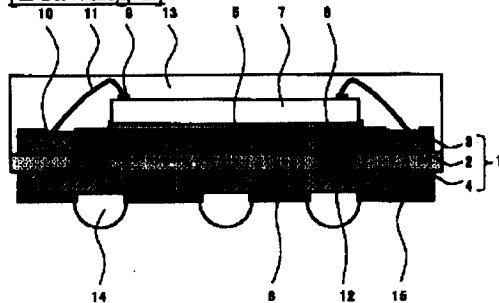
It is drawing explaining the conventional flexible sheet.
